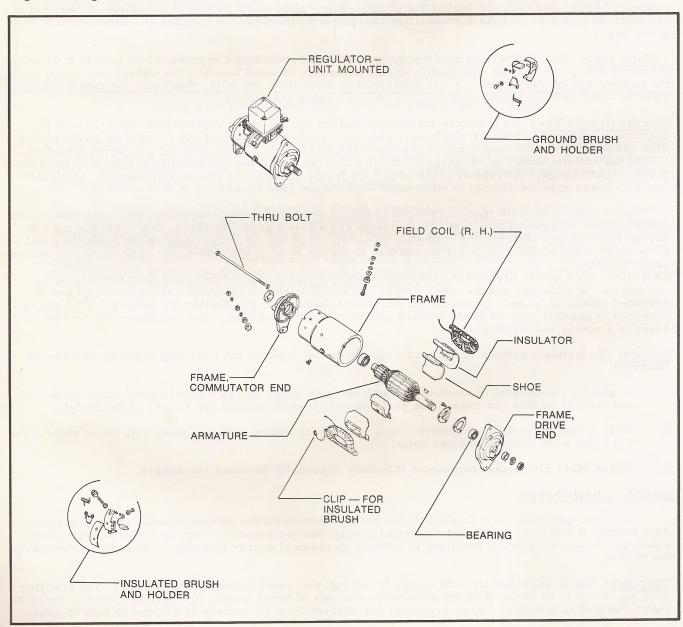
MOTOR-GENERATOR, EXPLODED VIEW
